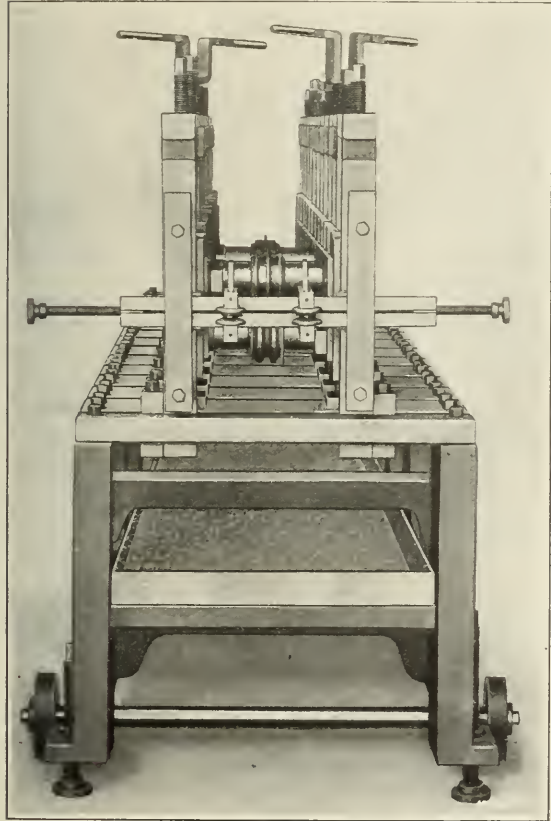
End View of Roll Head, showing Arrangement of Guide and Rolls
